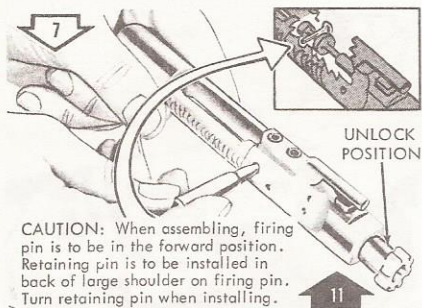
Disassembly/Assembly of Rifle (Page 1 of 4)
